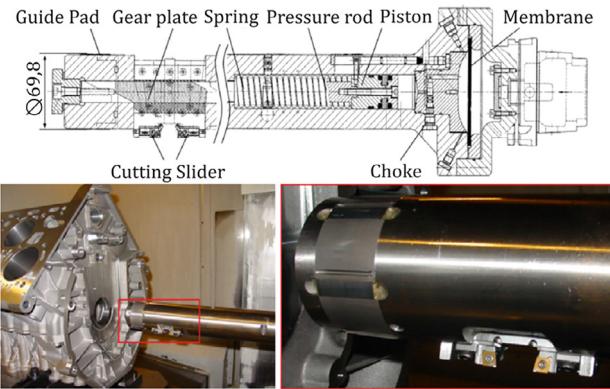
Coolant pressure controlled actuator system for machining of an axial crank-shaft bearing [30].
